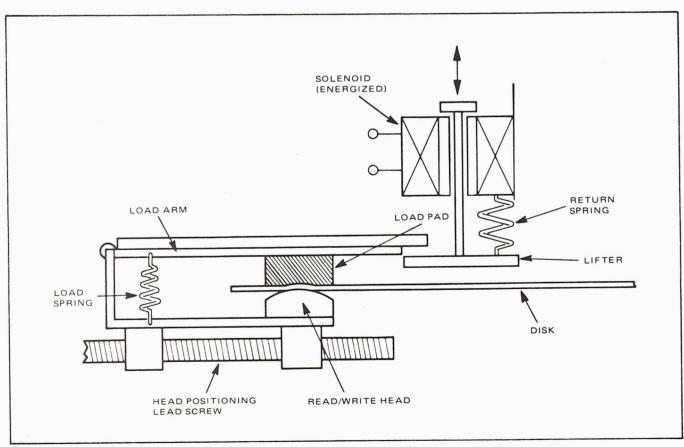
HEAD LOAD AND CARRIAGE ASSEMBLY
